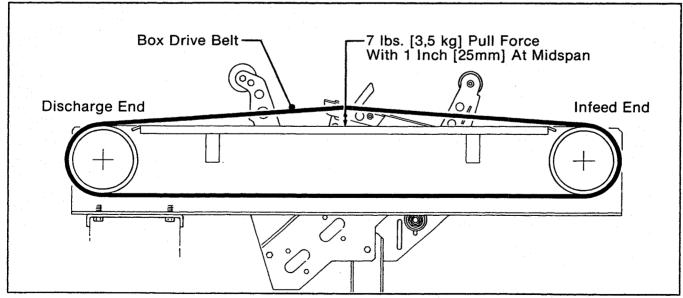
Box Drive Belt Tension Adjustment - Left Side View
